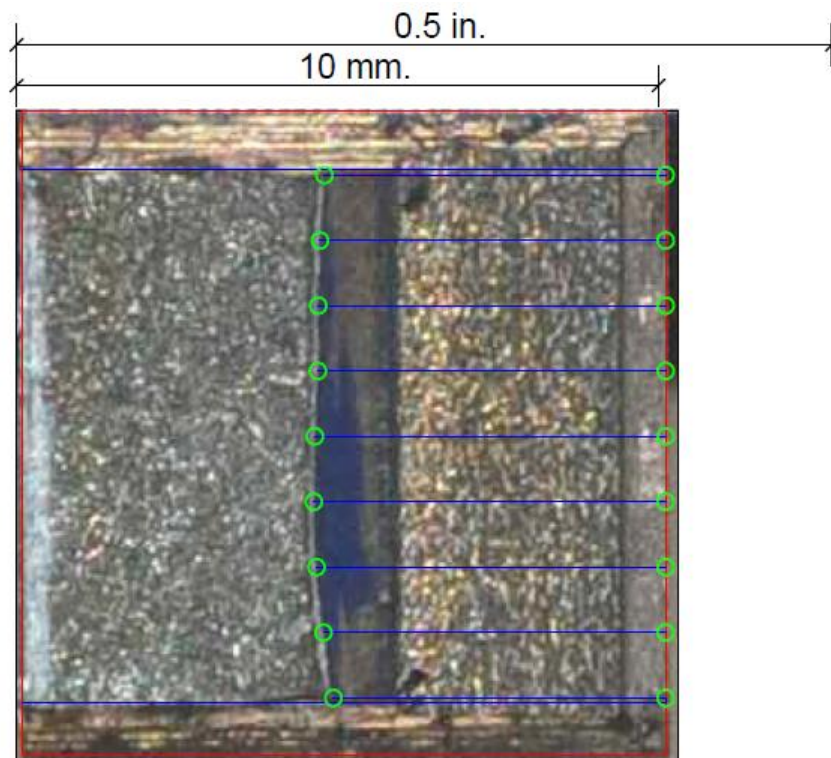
Specimen D9' Fracture Surface
